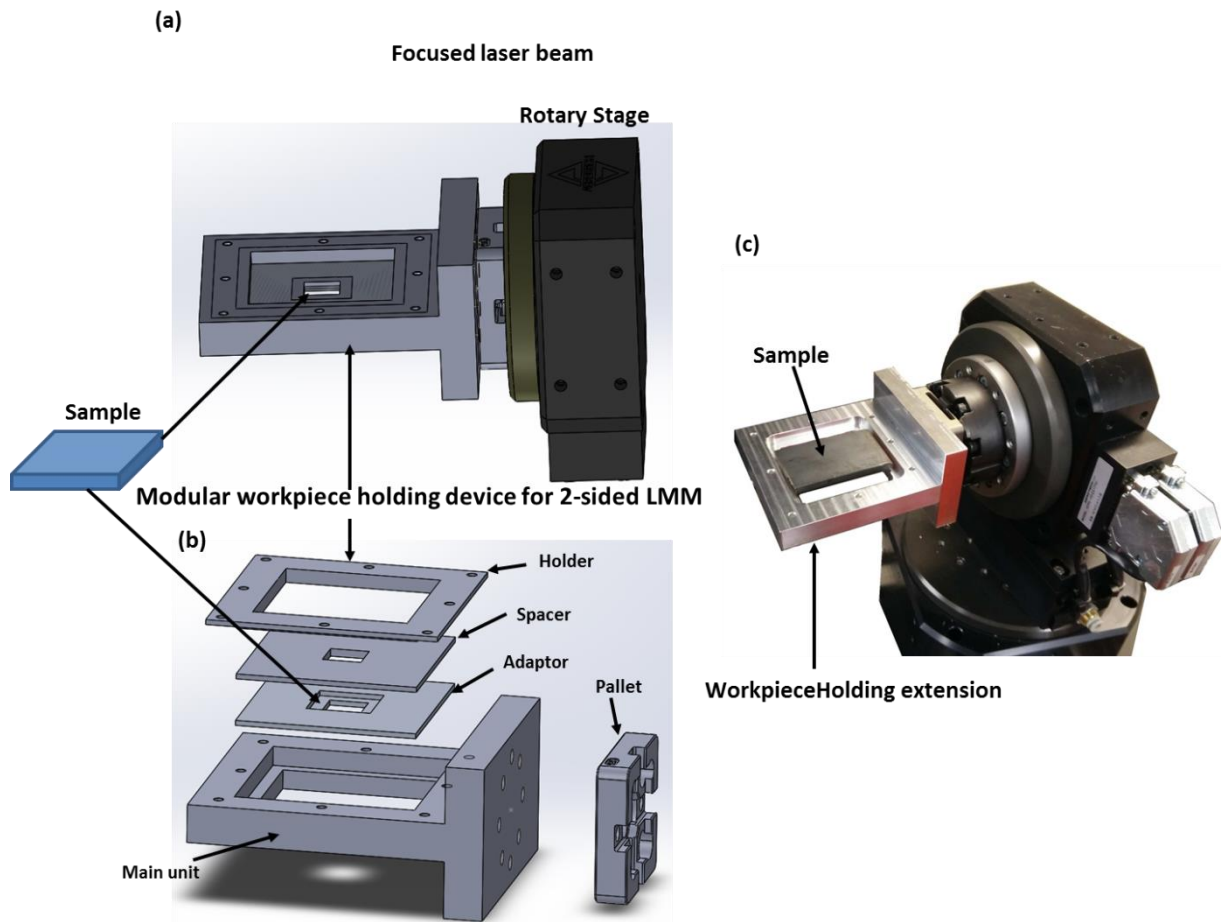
(a) The design of a workpiece holding device to enable two-side laser micro-processing operations (b) Exploded view of the proposed workpiece holding extension and (c) An overall view of the produced workpiece holding devices, implemented in the laser system
